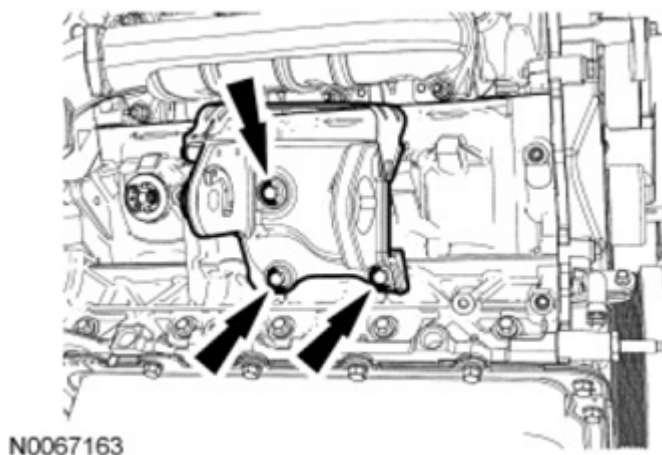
Locating RH Engine Support Insulator Bracket Bolts
